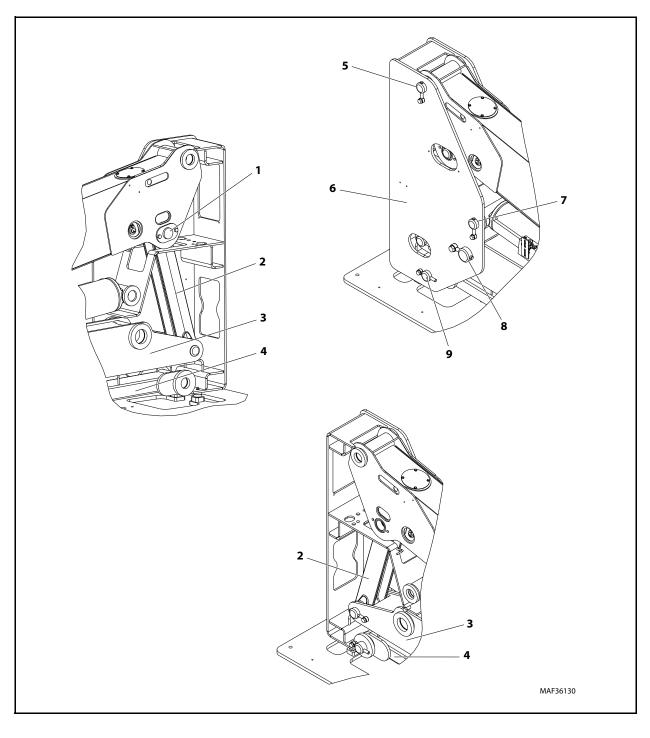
Boom Assembly Cutaway - Sheet 1 of 2
